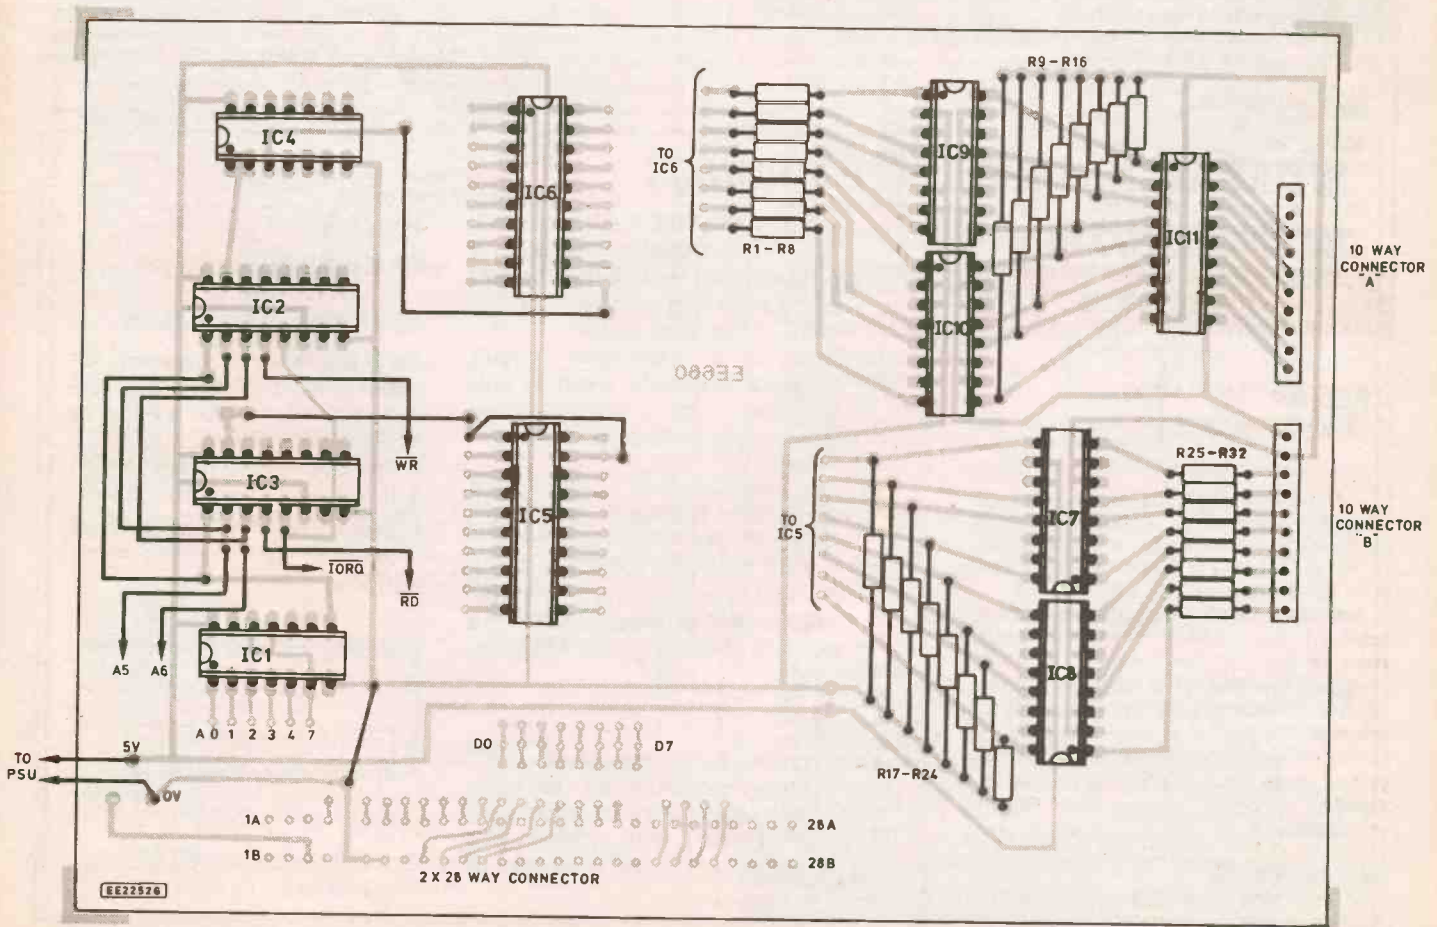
Component layout and full size printed circuit board copper foil master for the Interface Card.
